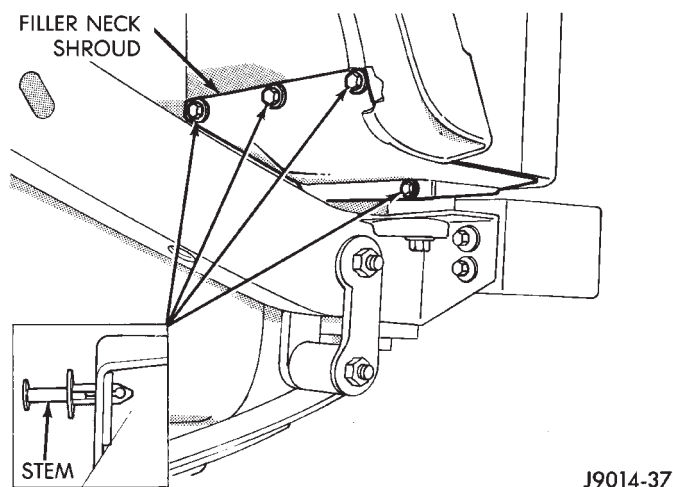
Fuel Filler Neck Shroud—YJ Models
